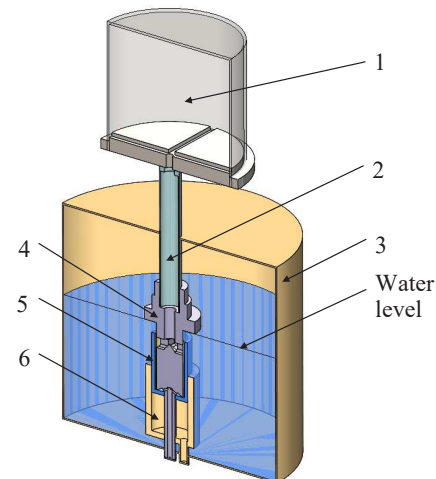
Scheme of connection of the valve to the combustion chamber: 1 – combustion chamber; 2 – connecting line; 3 – water tank; 4 – exhaust valve; 5 – piston; 6 – control pressure supply chamber
